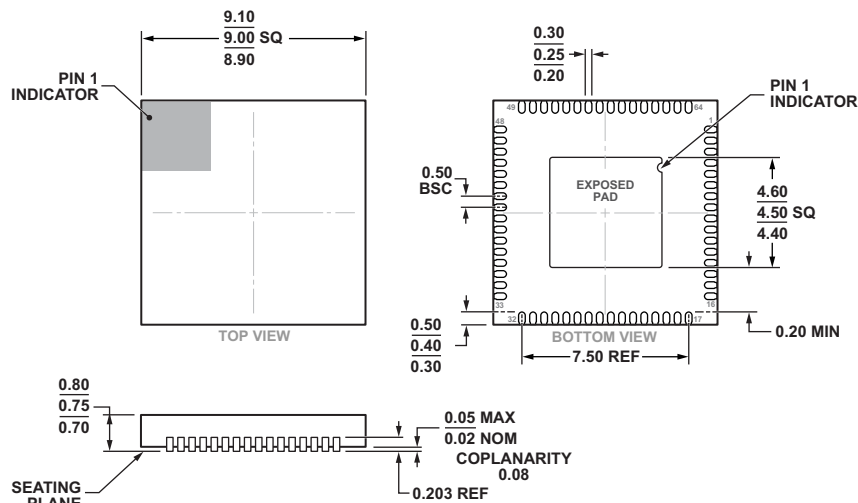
64-Lead Frame Chip Scale Package [LFCSP]
